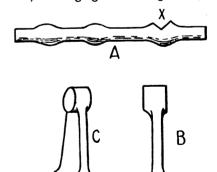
PORGING LIPTING SHAFT FROM OLD AXLE.
